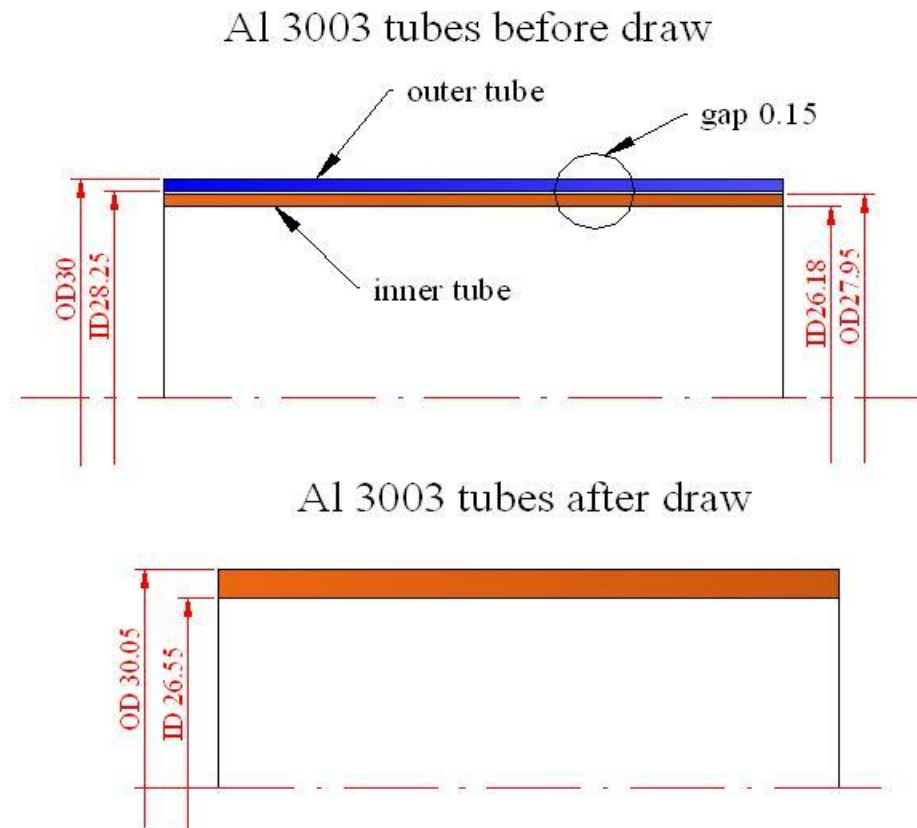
Changes in diameters of Al tubes before and after drawing.
